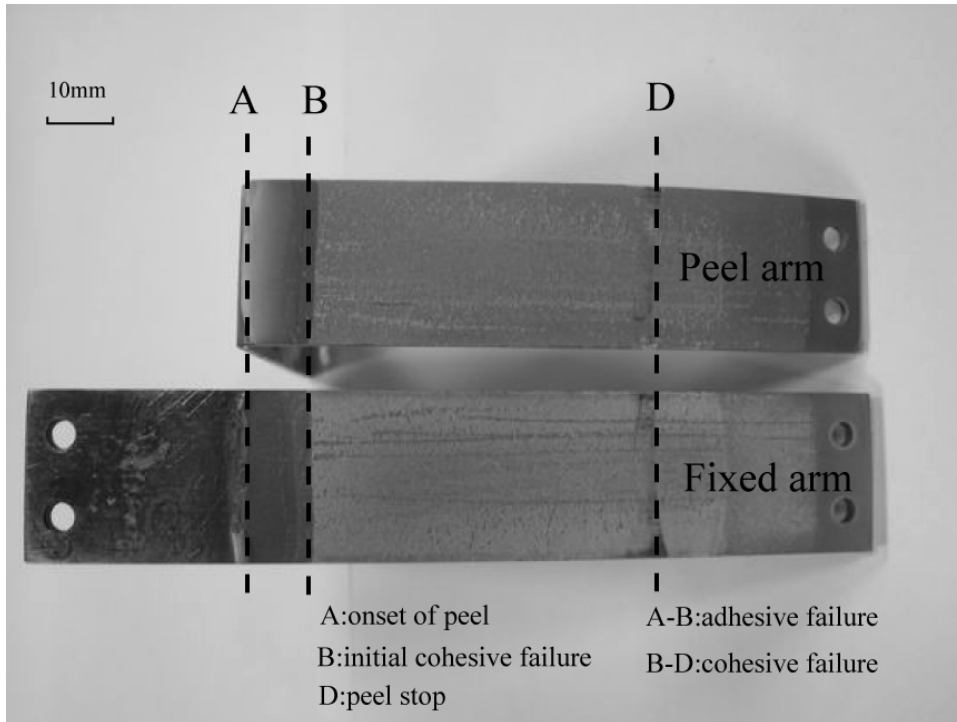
5 Fracture surface of Fixed Arm Peel test (0.2mm adhesive thickness)
